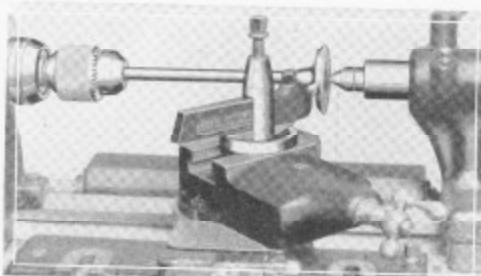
Refacing a Valve at a 45 Degree Angle by Turning Using a Three-Jaw Drill Chuck to Hold Valve
